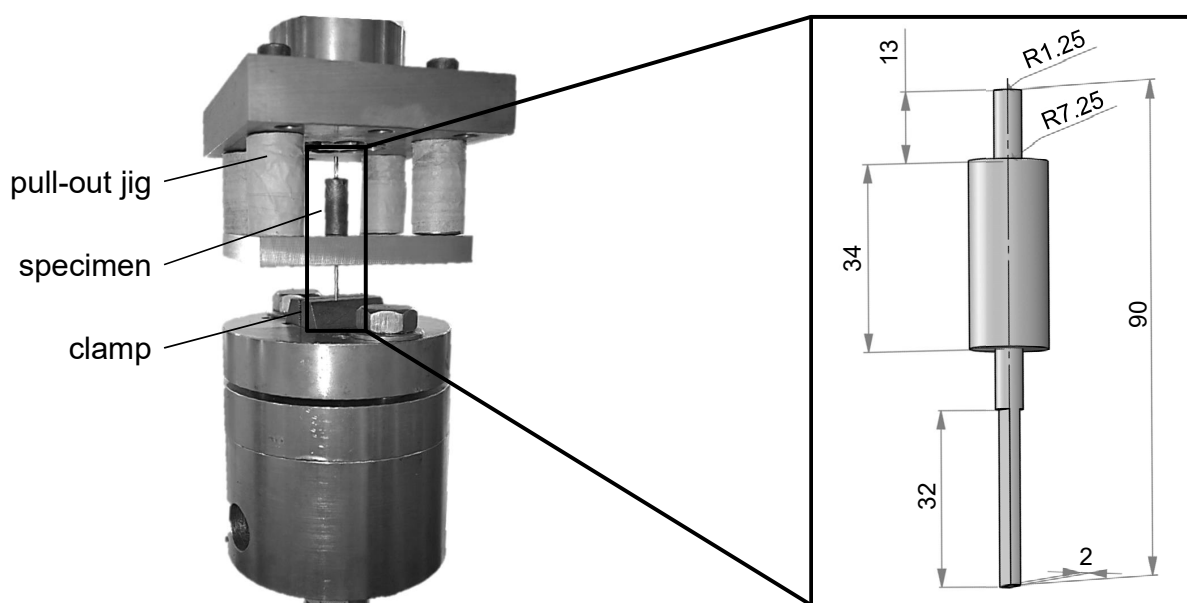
Cylinder pull-out test set-up (left) and specimen geometry (right)
